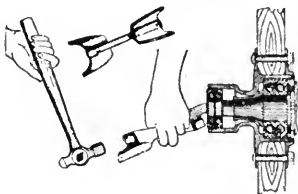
Illustrating Proper Method of Driving Bearings in Place with Yoke Member of Soft Metal.
